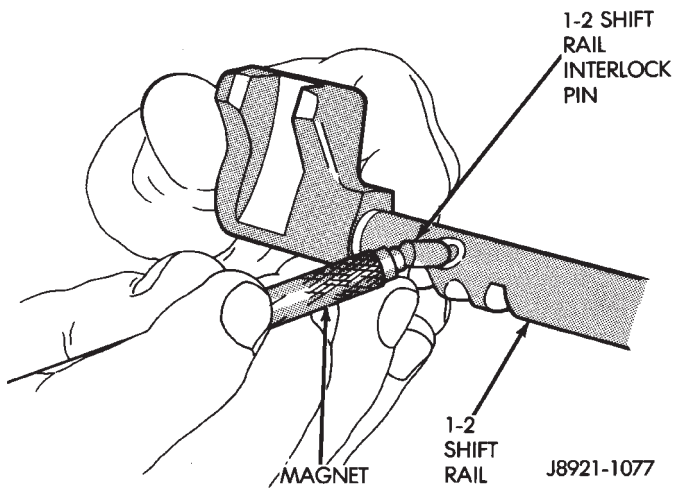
Installing 1-2 Shift Rail Interlock Pin
